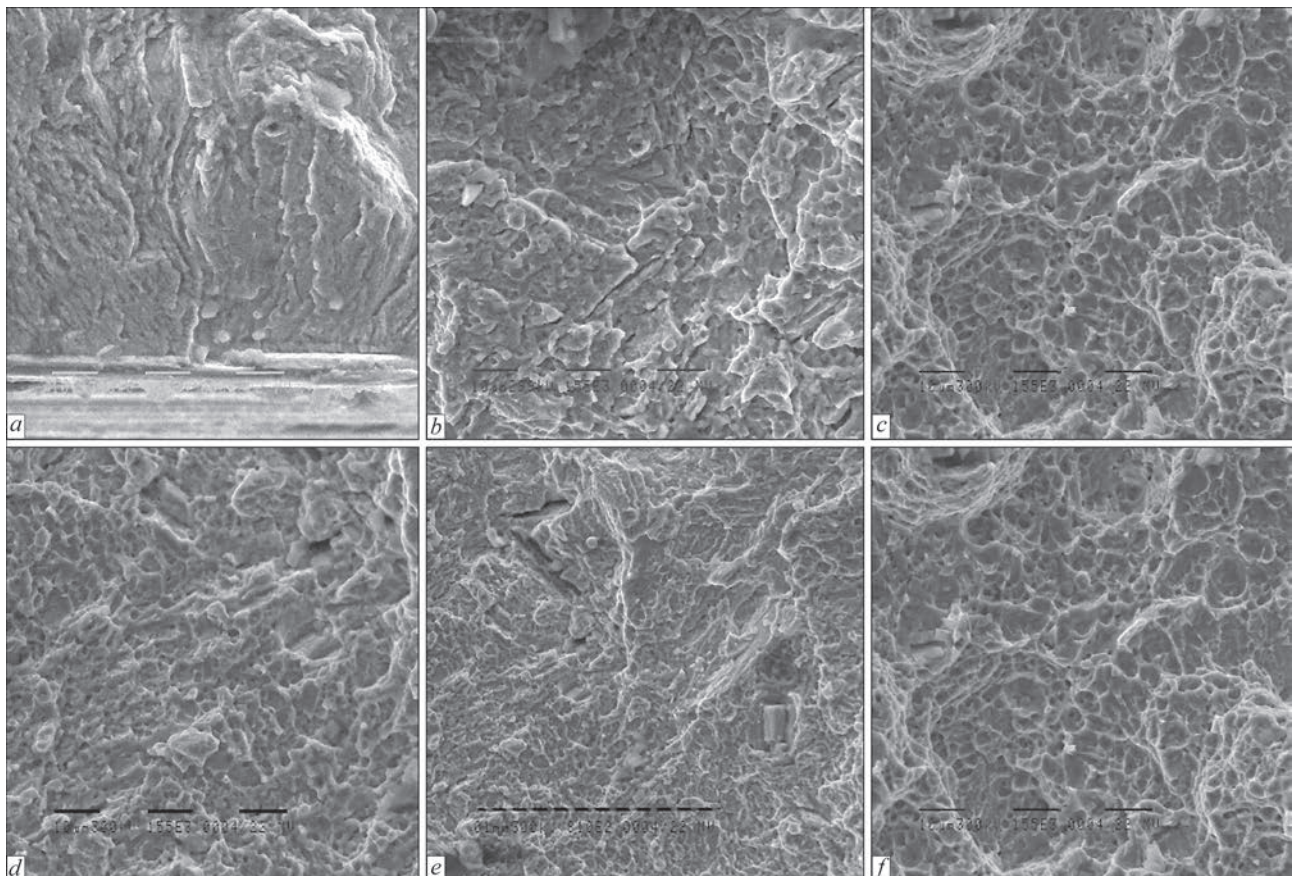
Fracture mode by fracture zones of armoured steel ($w_{6/5} = 3/8$ °C/s): *a, b* — in the fatigue crack zone; *c, d, e* — in the zone of main crack propagation; *f* — in the final fracture zone (*a-d, f* — $\times 1550$; *e* — $\times 810$)
